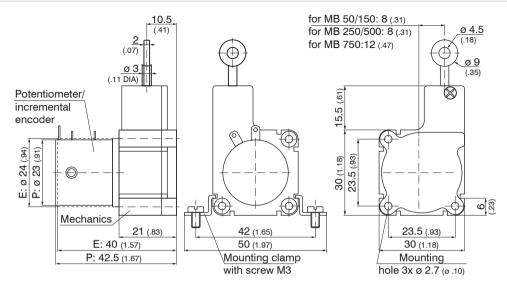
Dimensional drawing WPS- ... -MK30 with potentiometer or encoder, dimensions in mm (inches), not to scale
